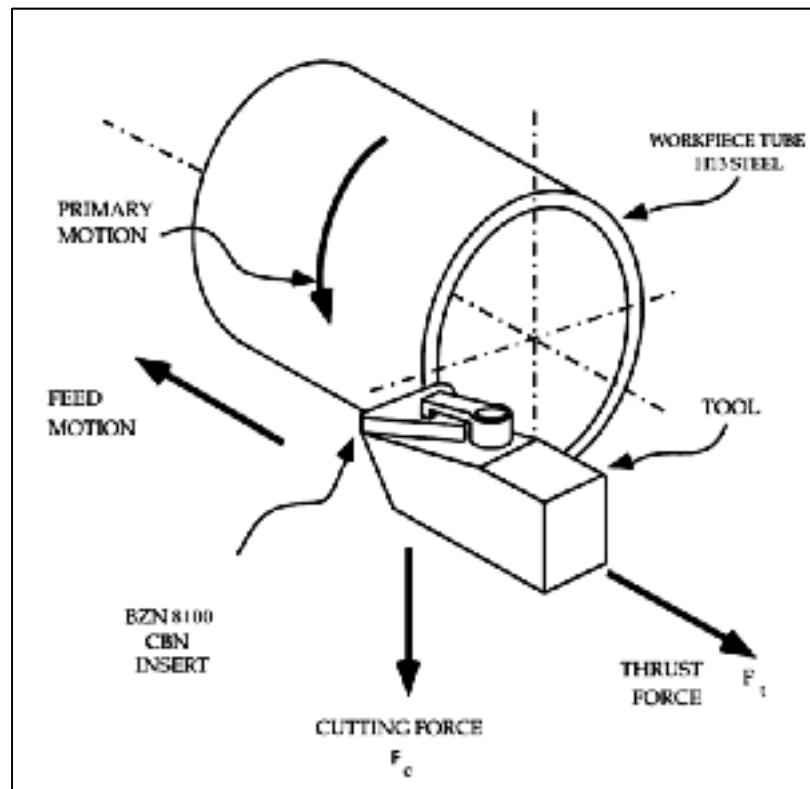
Illustration of orthogonal cutting experimental set-up on tube-shaped workpiece (Özel, 2003)
